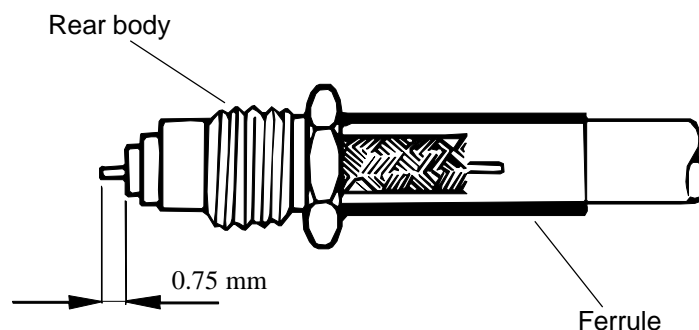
Insertion of trimmed cable into back end of rear body.
